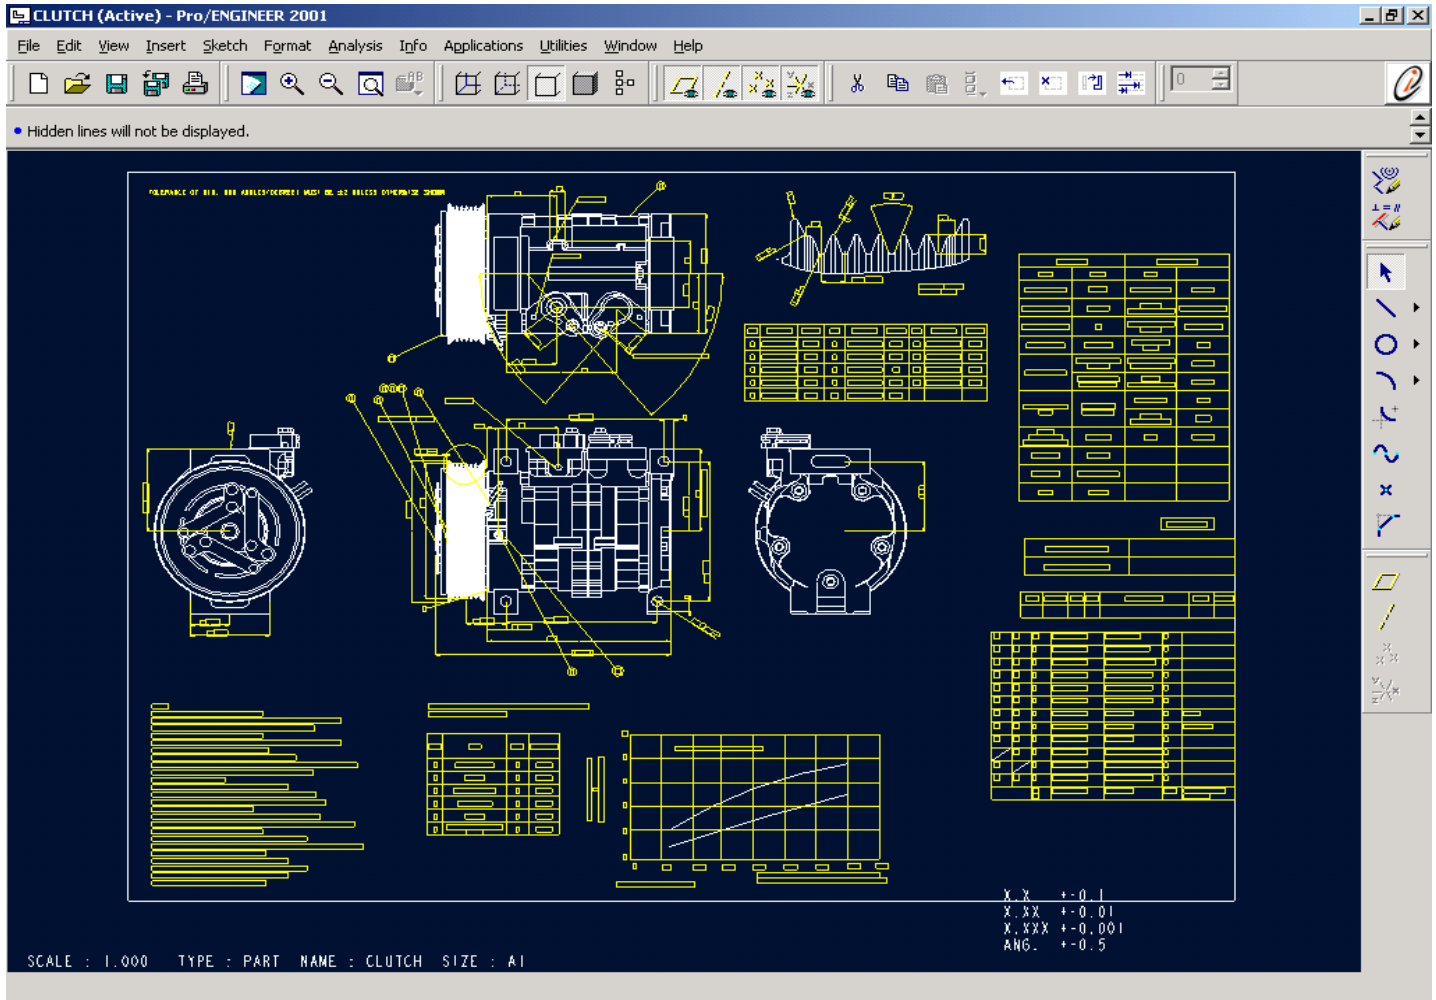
2-D Drawing Of Compressor Assembly Magnetic Clutch
